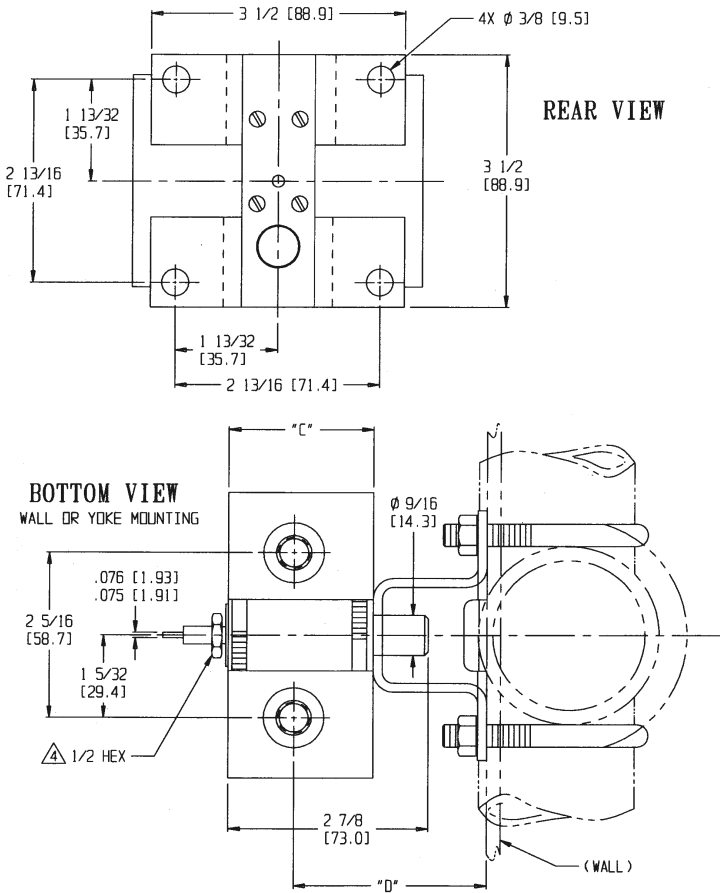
224/224C Dimensional Drawing (Continued) (Part 2 of 2)
